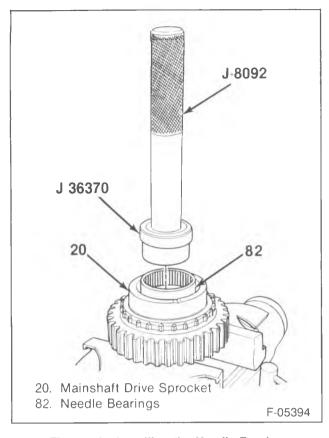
Installing the Needle Bearing to the Front Drive Sprocket
